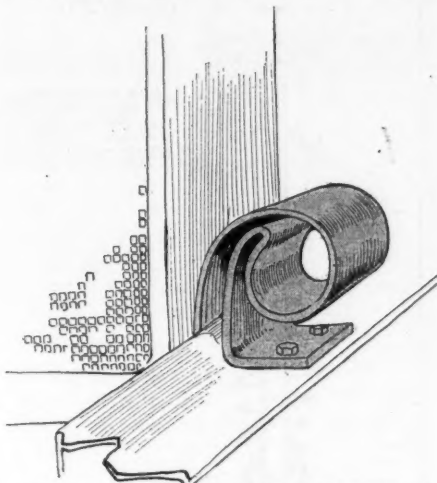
LA BUIRE RADIATOR SPRING BRACKET
